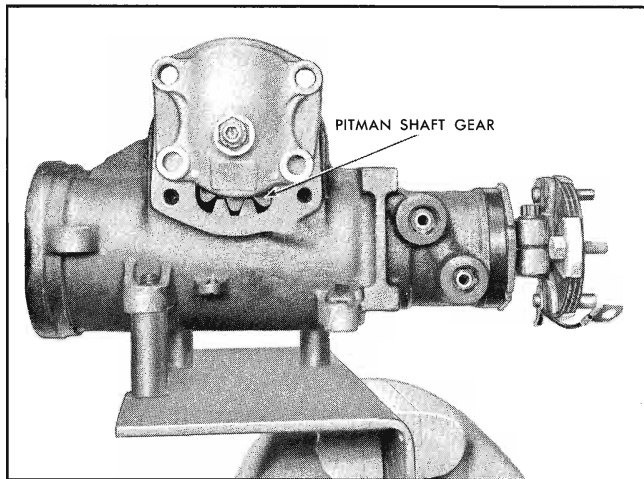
A-8 Position of Pitman Shaft Gear for Removal
